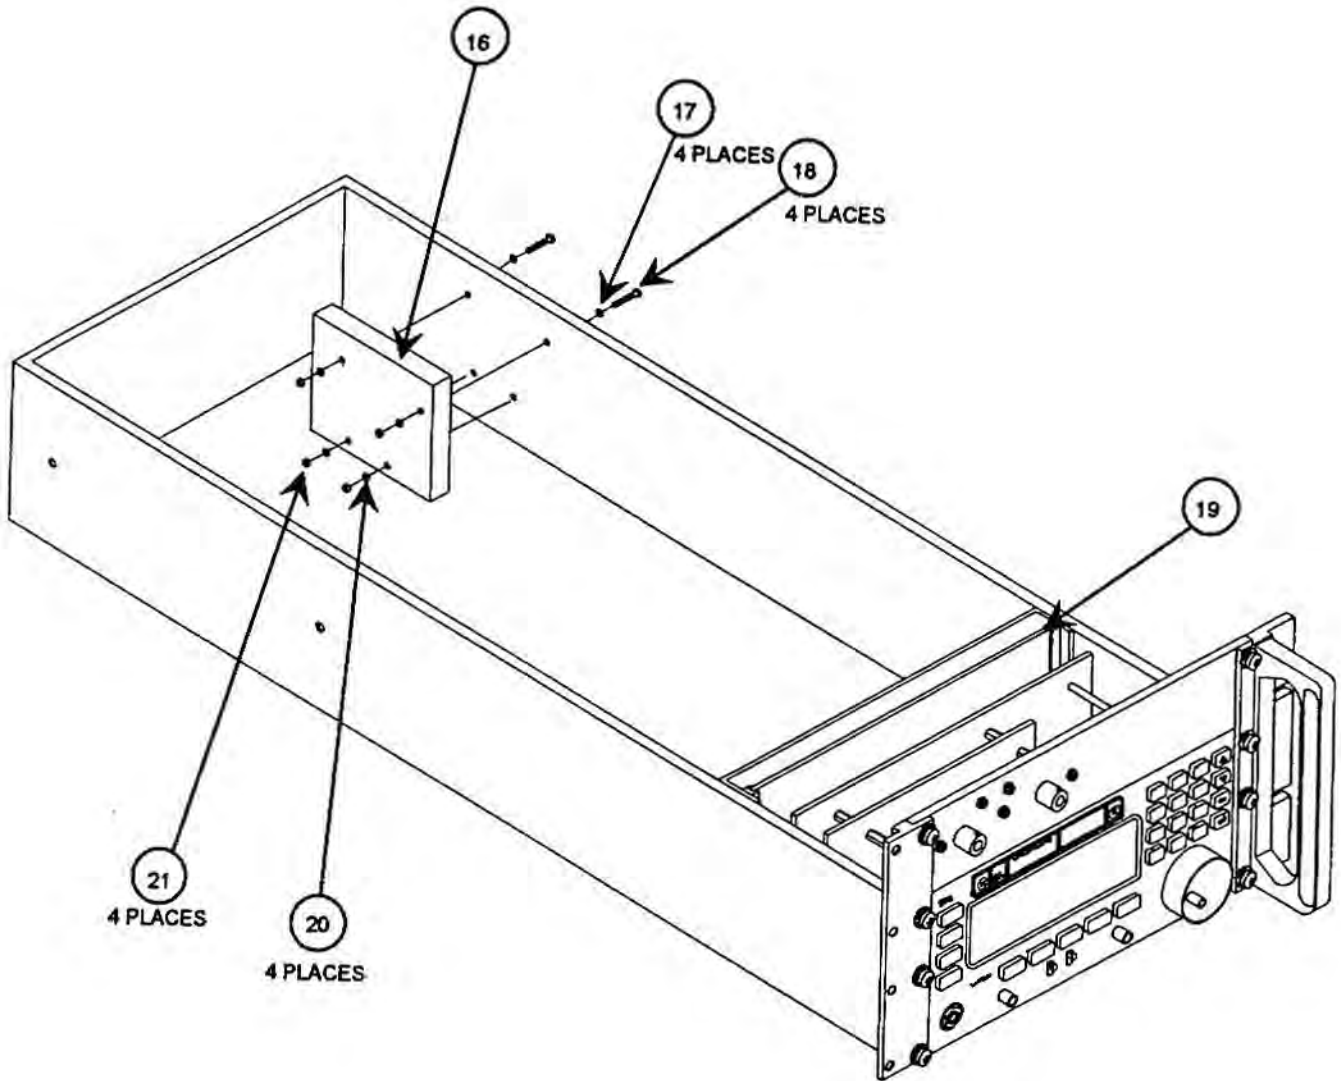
WJ-9902-2 Receiver Controller Assembly Parts Location
